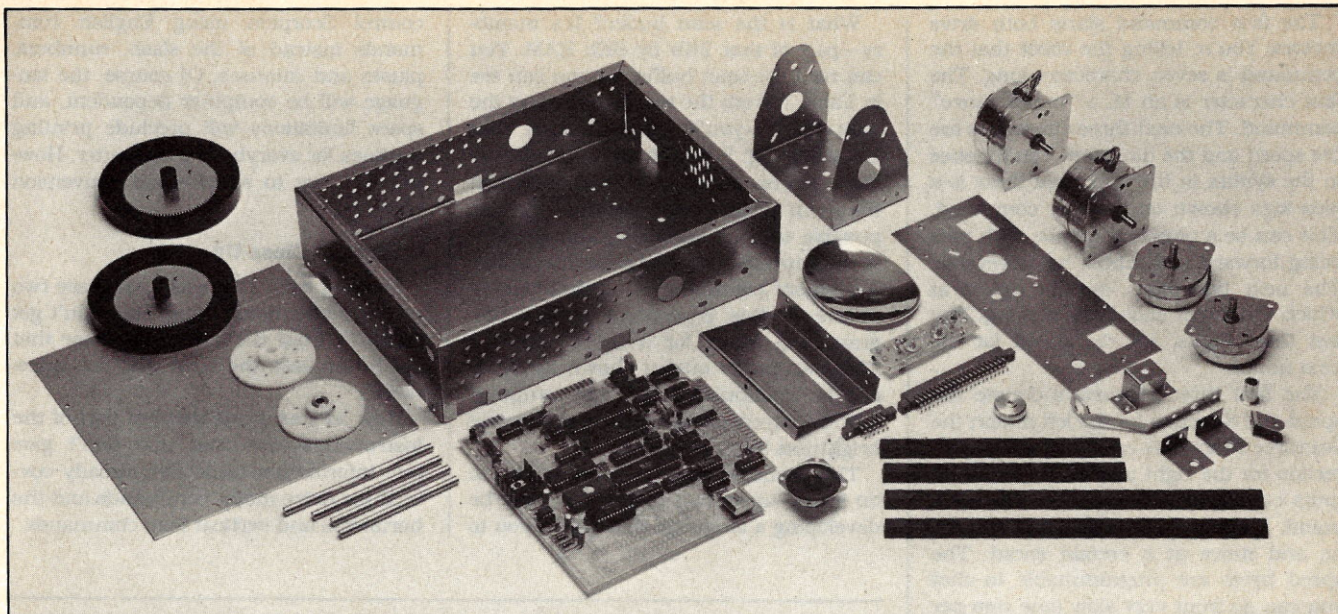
The major parts and controller board involved in the assembly of the Scorpion robot.
